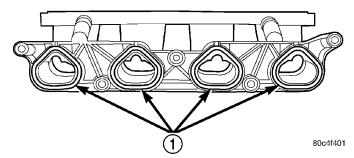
Lower Intake Manifold Seals - Naturally Aspirated Engine
